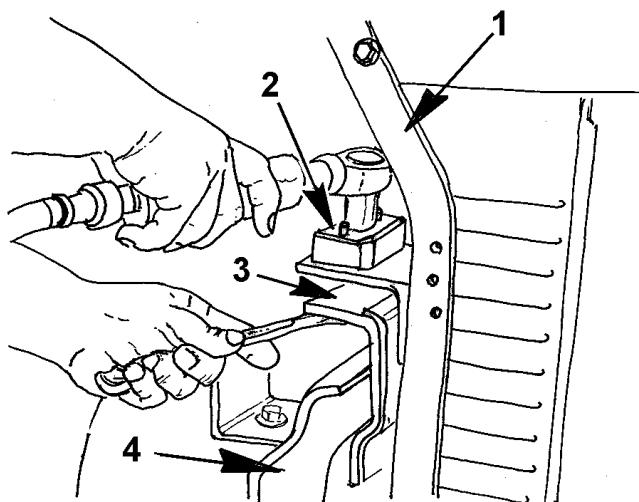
Radiator Mounting Bracket And Bushing (Passenger Side Shown)
